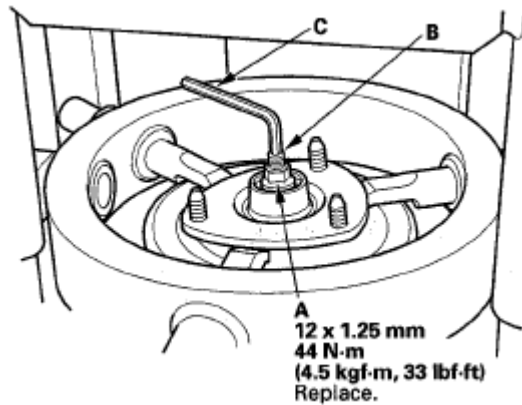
Identifying Self-Locking Nut On Damper Shaft With Torque Specification
